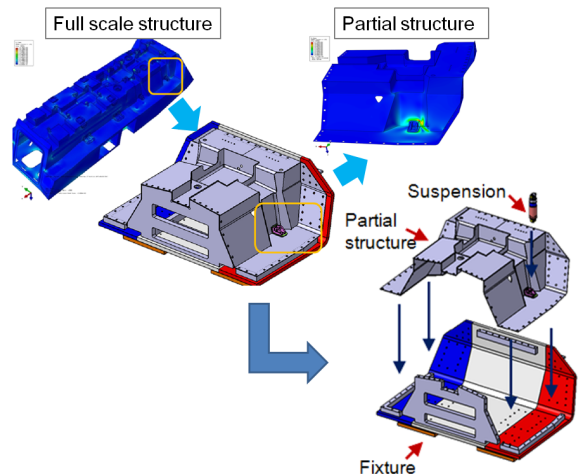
Illustration of partial structure and test fixture ; FEM analysis for design of test fixture
